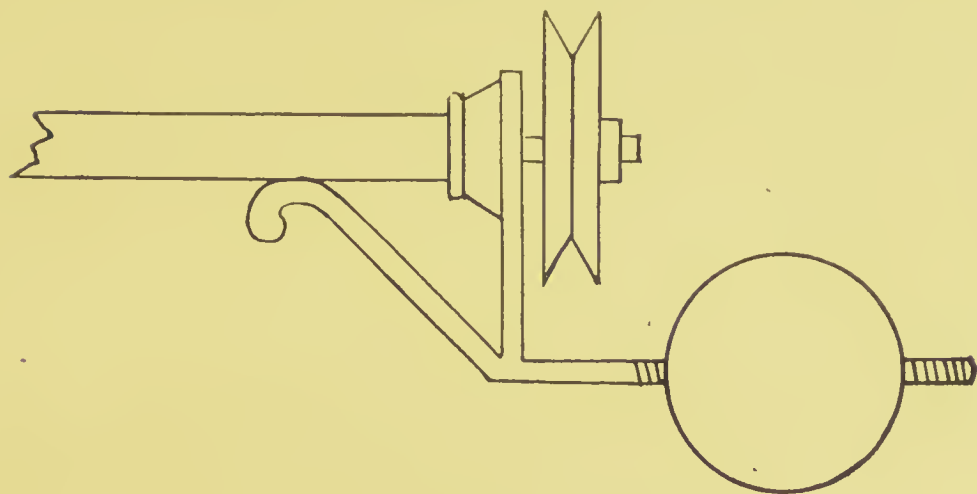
BALANCING HEAD OF TAGGART ENGINE.
